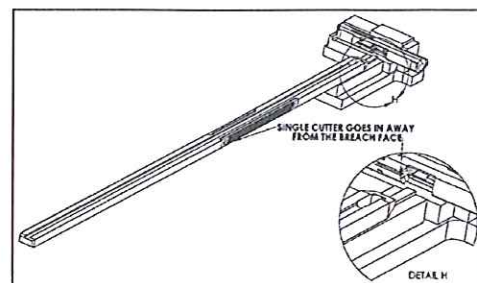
Pneumatic slide clamp with slide in place and single broach cutter
